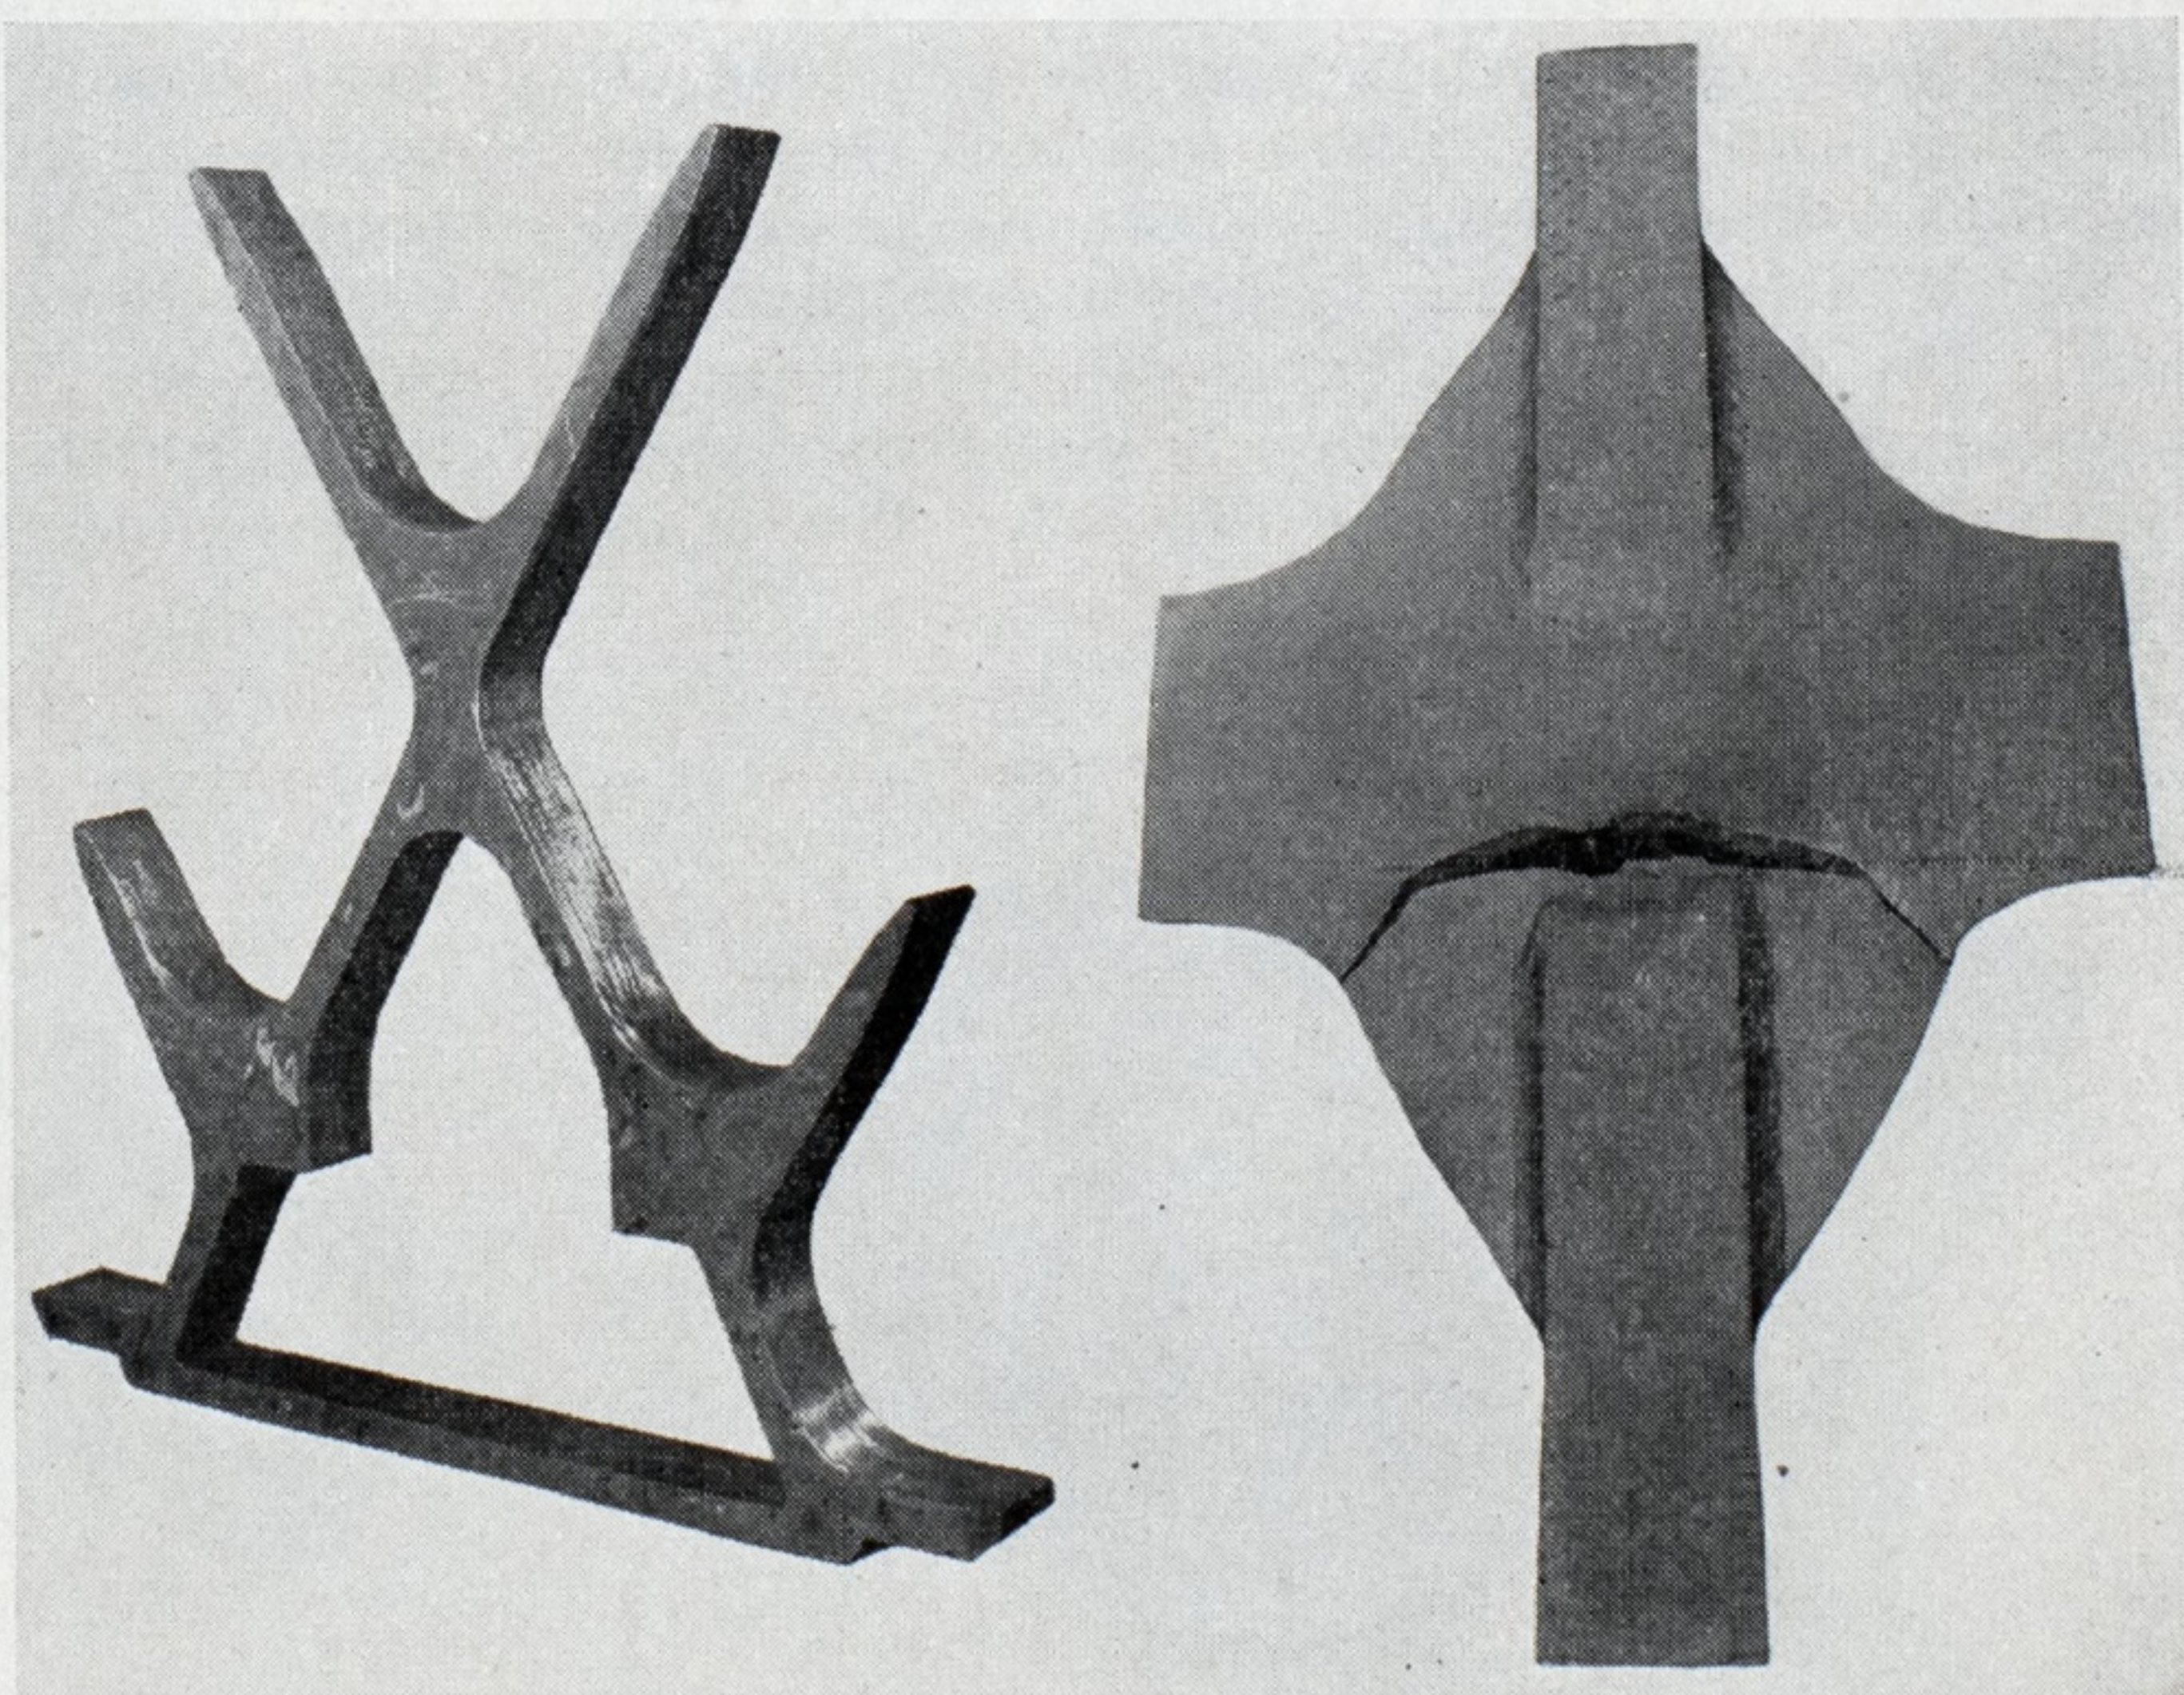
(Left)—This shows the type of flame-cut main frame which was used in construction of the 1000-horsepower twin six engine. Fig. 14 (Right)—Tensile test of a peculiarly-shaped transition joint. The break occurred outside the weld
